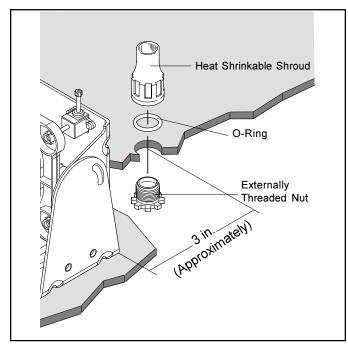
HEAT SHRINKABLE SHROUD ASSEMBLY
